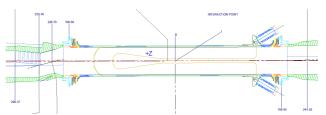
Drawing of the Be beam pipe and bellows sections at each end of the Be. The Be is brazed to stainless steel sleeves and the bellows sections are welded to the SS sleeves. The Be is cooled by water which enters and exits through the tubing on the right side of the drawing. The main SR mask for the LEB can be seen on the left and is 25 cm from the IP, the SR mask for the HEB is located on the right side but is farther away (50 cm from the IP) and is not seen.
